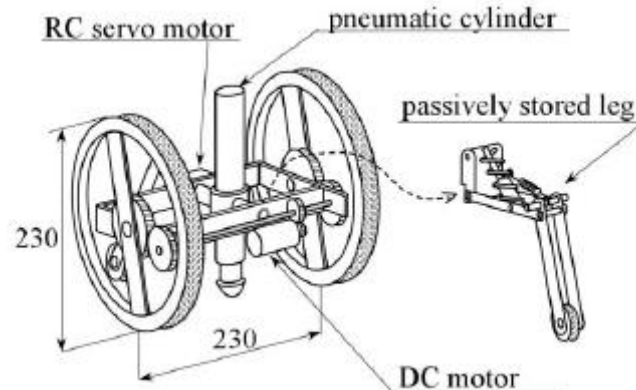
Electrical and mechanical components used to design the Leg-in-Rotor robot
